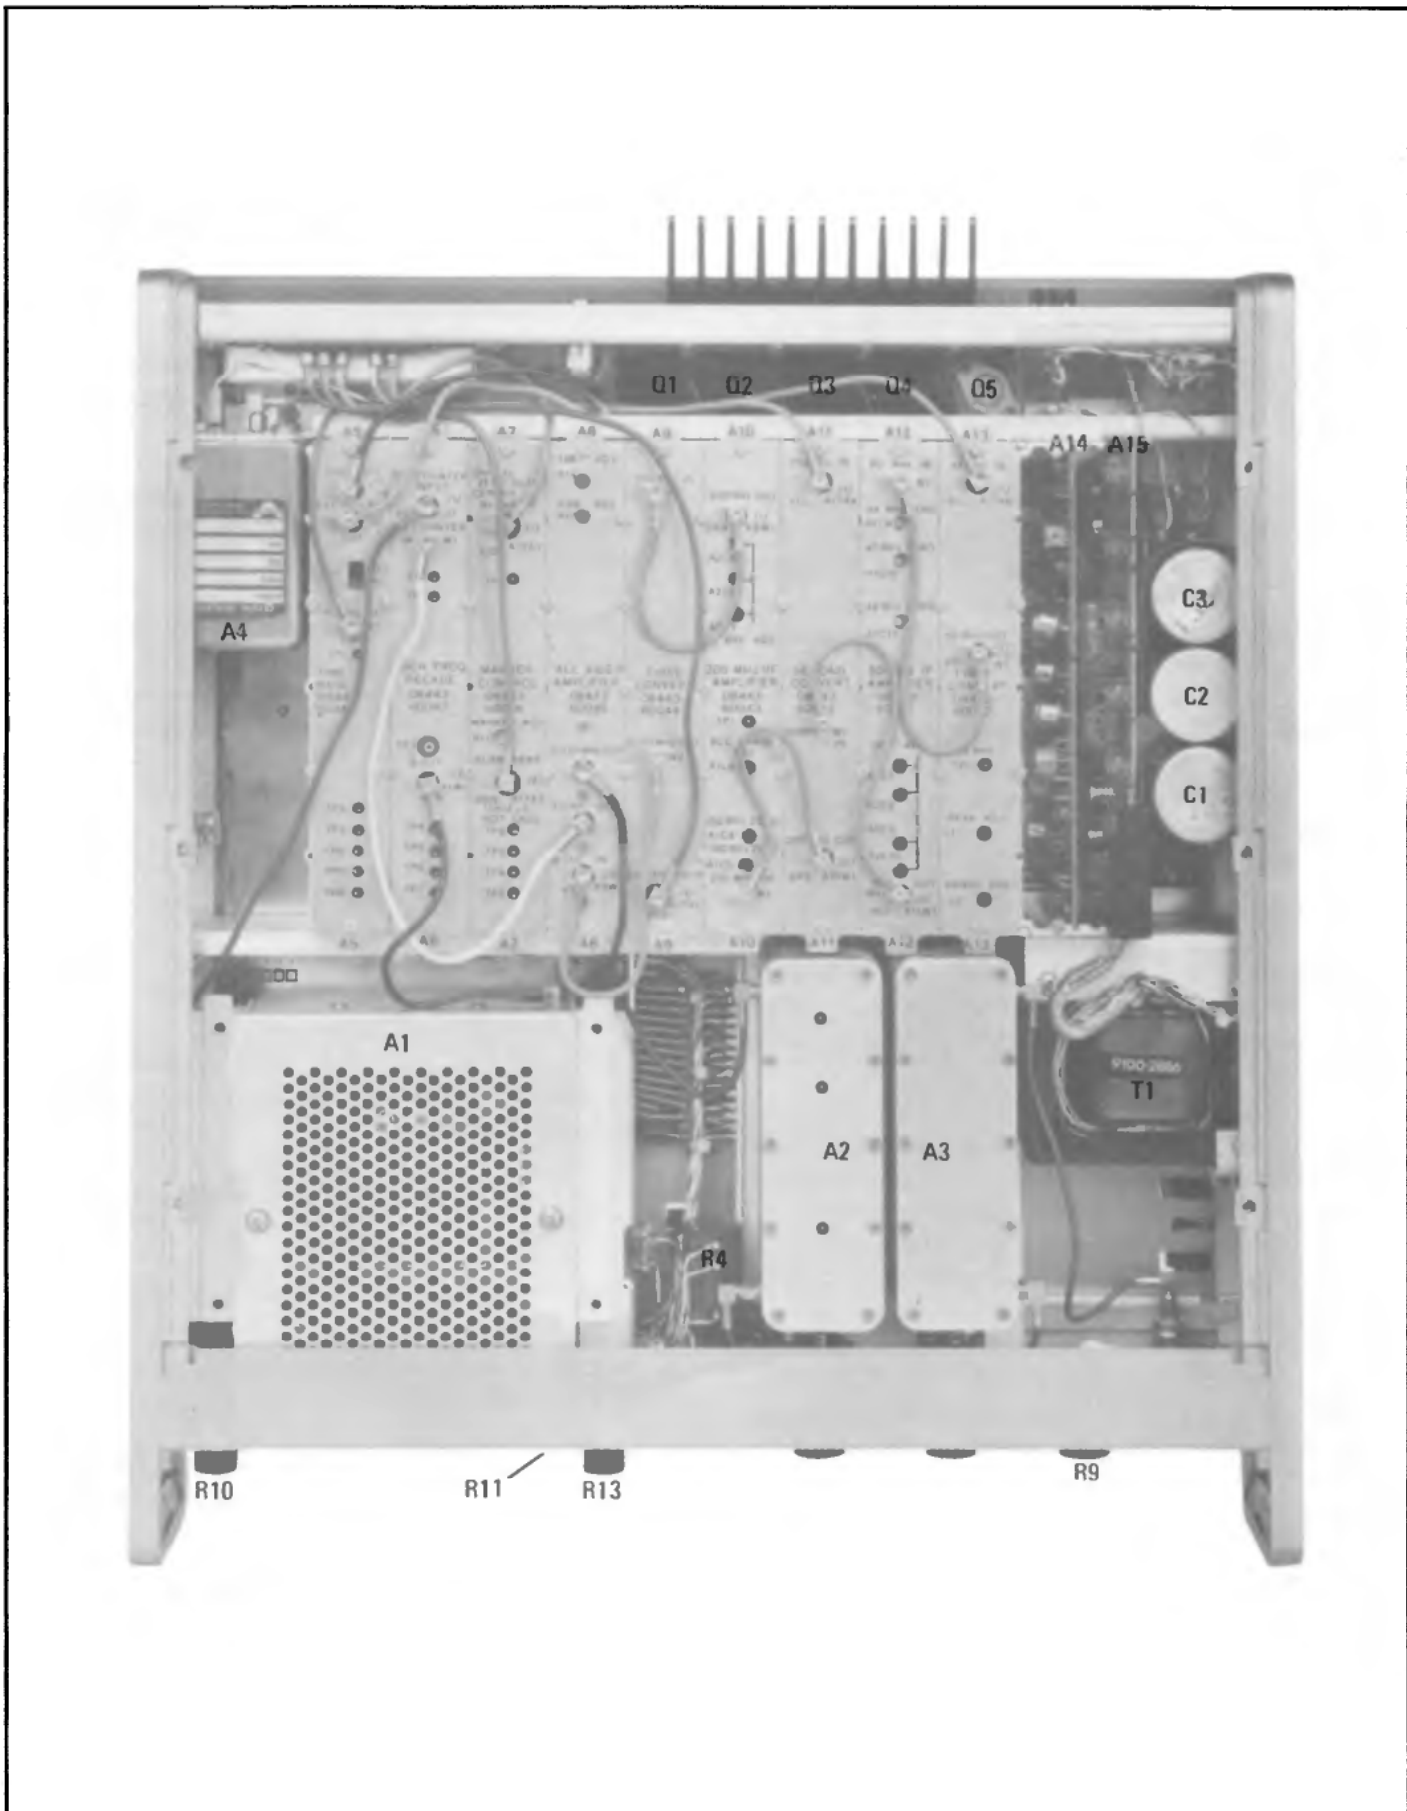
Chassis Mounted Parts and Assembly Locations
